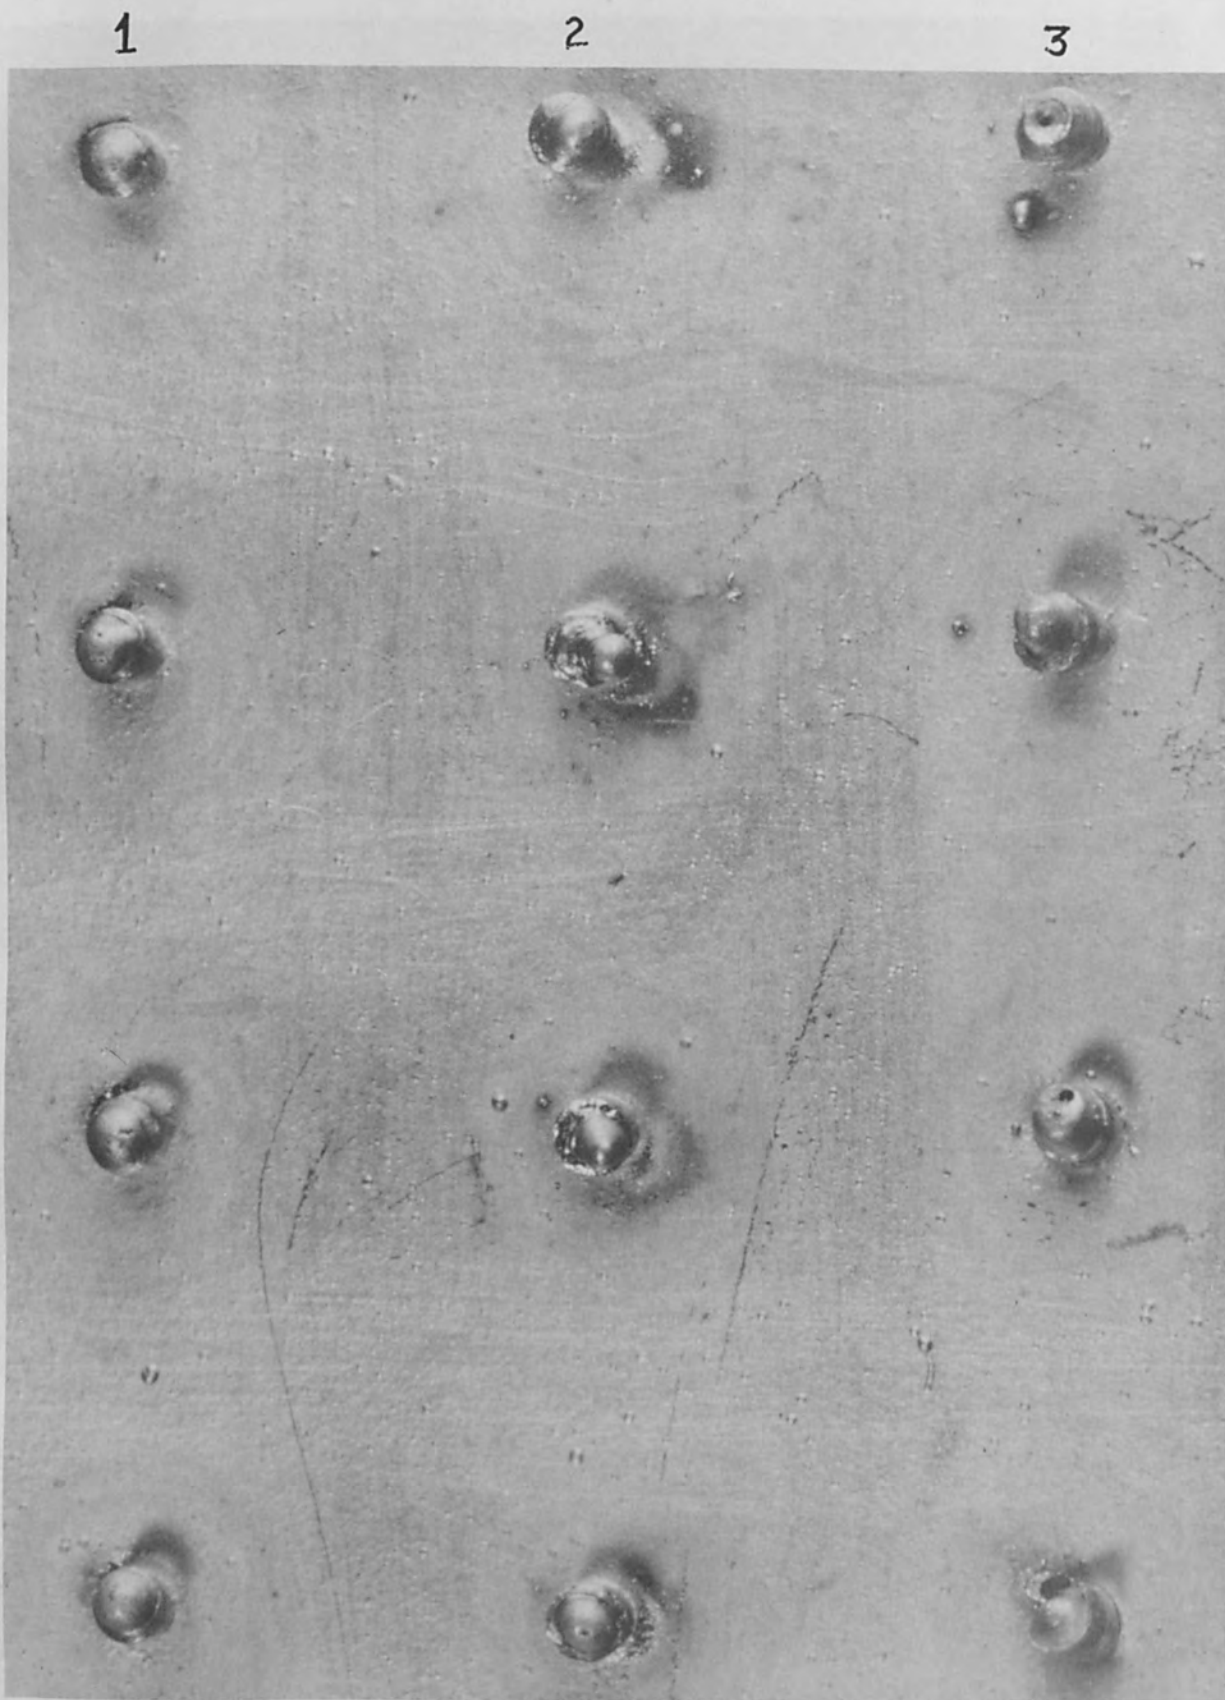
Laser welds of nickel wire to Polyweld.
